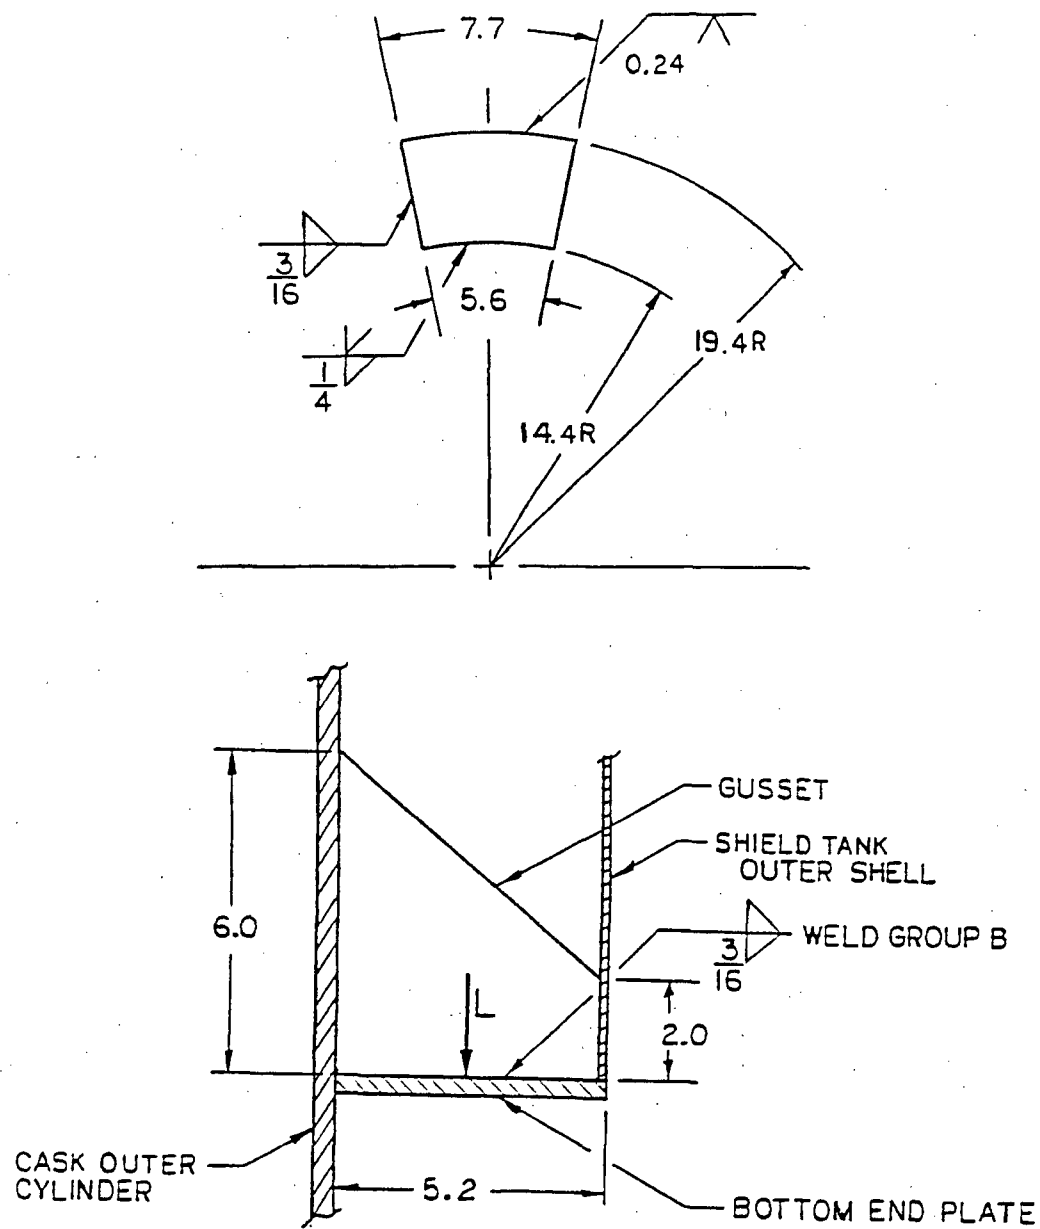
Component Parts of the Expansion Tank Structure
